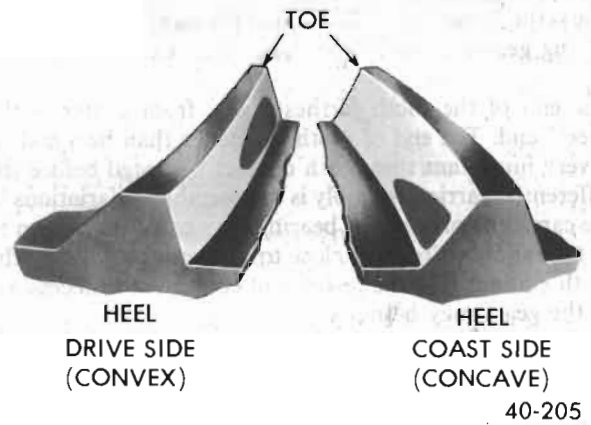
Tooth Pattern - Pinion Too Close to Ring Gear (Excessive Shim Thickness)
